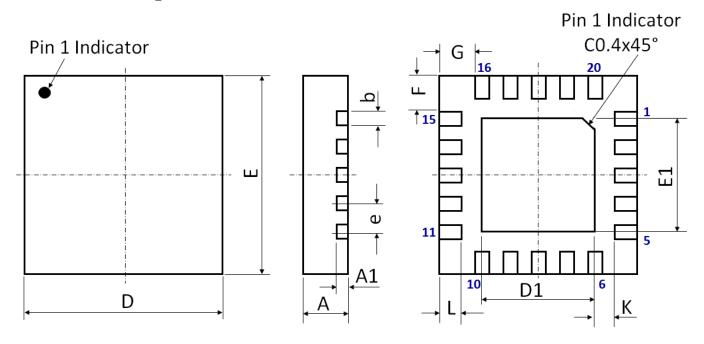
Device Package Drawing (All dimensions are in mm)
